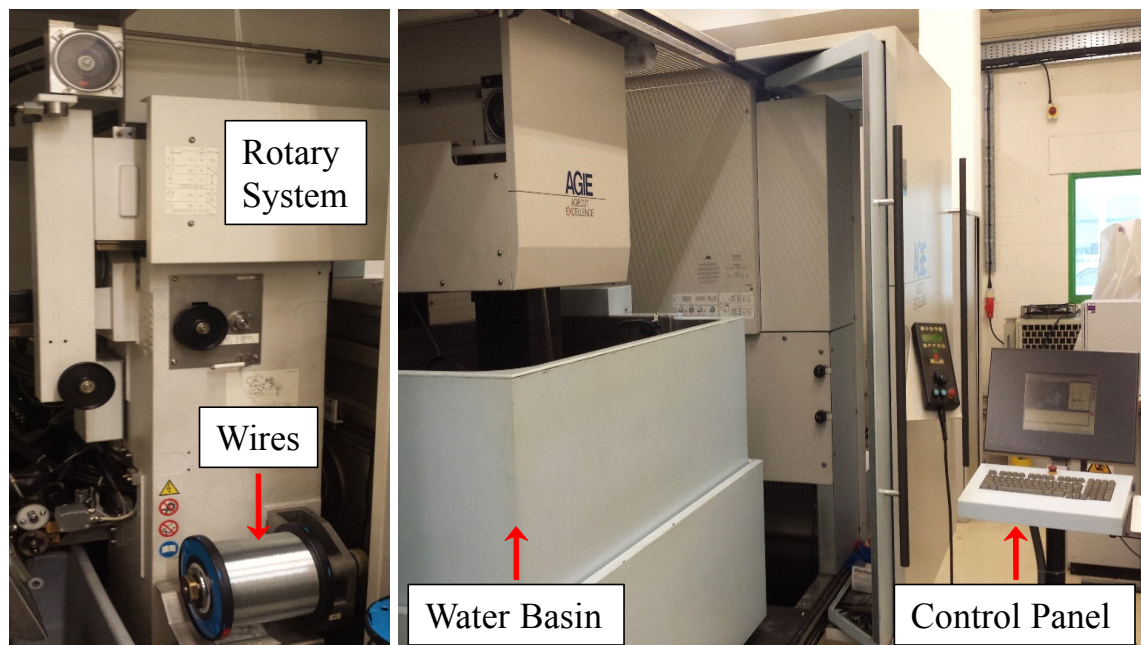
AGIE Wire Cut machine for providing a smooth surface finish.
